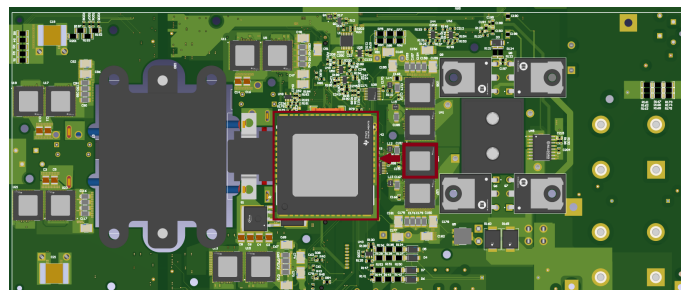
Short-circuit defect between adjacent pads of the GaN FET caused by excessive solder during assembly
